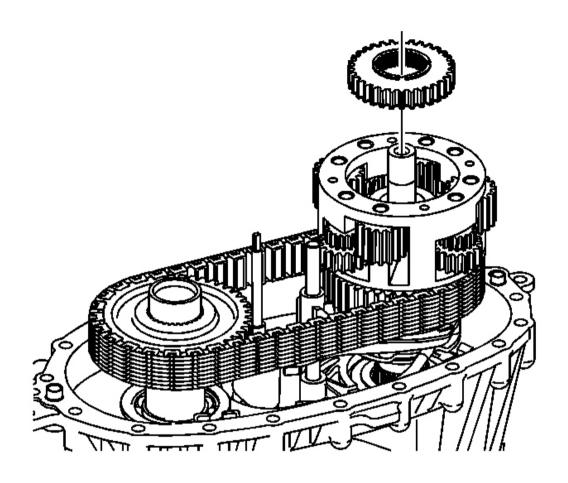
Rear Sun Gear Courtesy of GENERAL MOTORS CORP.
